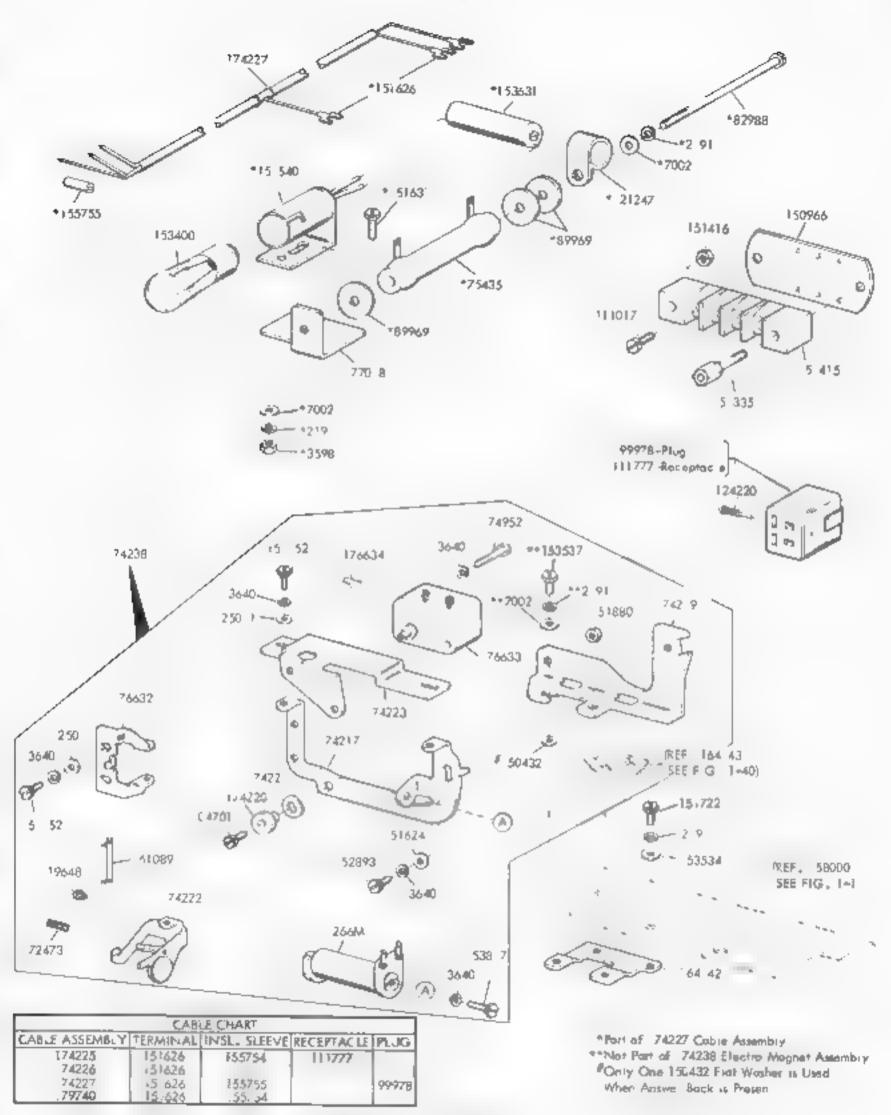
164426 MODIFICATION KIT TO ADD HORIZONTAL TAB DISABLER
